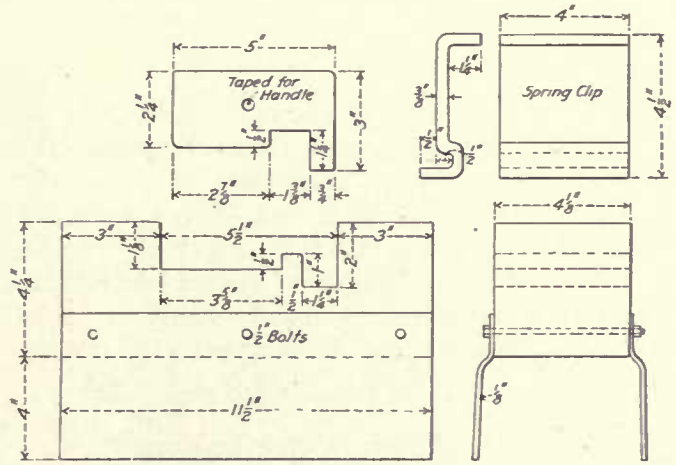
Dies for Forging Spring Clips Under Steam Hammer.
